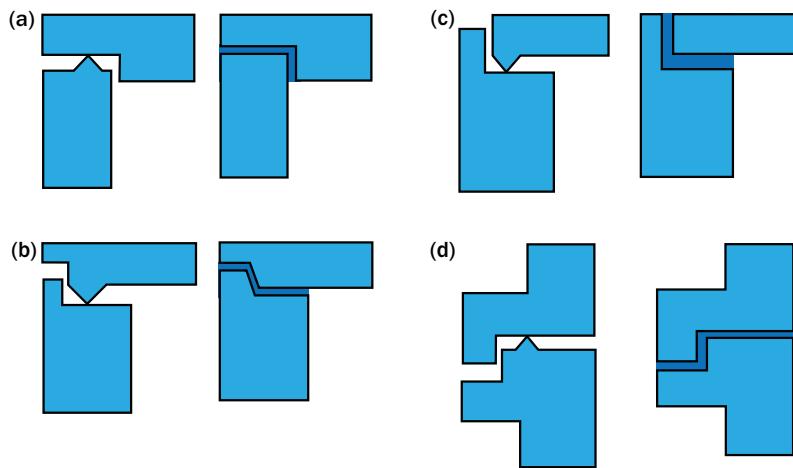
Recommendations for the design of ultrasonic welded joints
